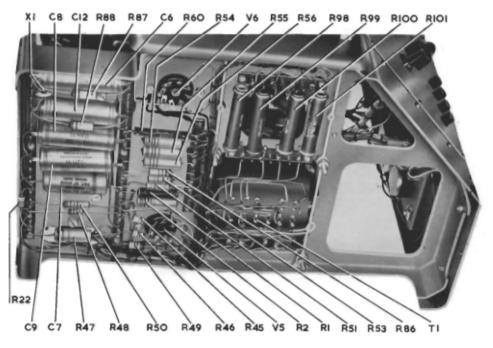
SIDE PANEL SHOWING MAINS TRANSFORMER
